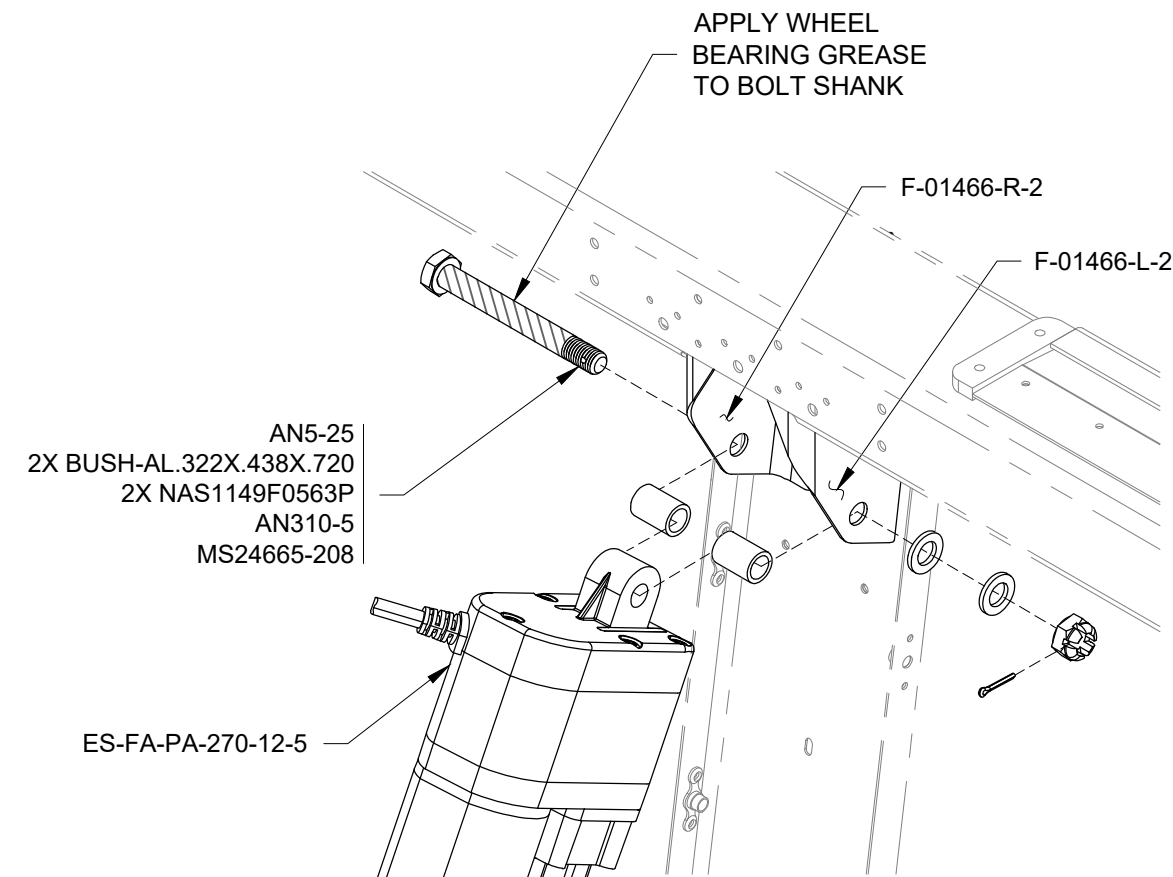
UPPER FLAP MOTOR ATTACHMENT
